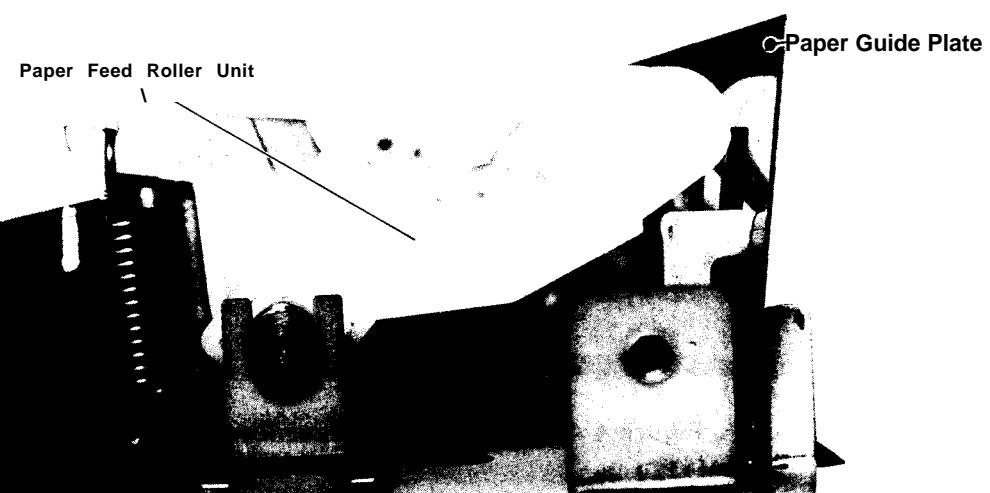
Paper Guide Plate and Paper Feed Roller Unit Relationship
